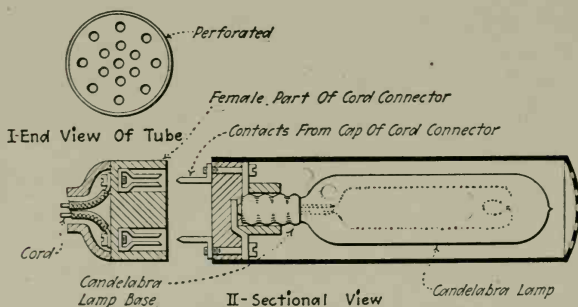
Pocket test lamp. (*Power Plant Engineering*, Feb. 15, 1920.)
